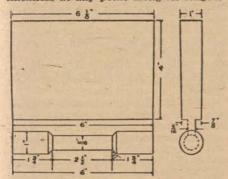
(b)—Standard form of test specimen coupon required for tension tests of bronze castings.
